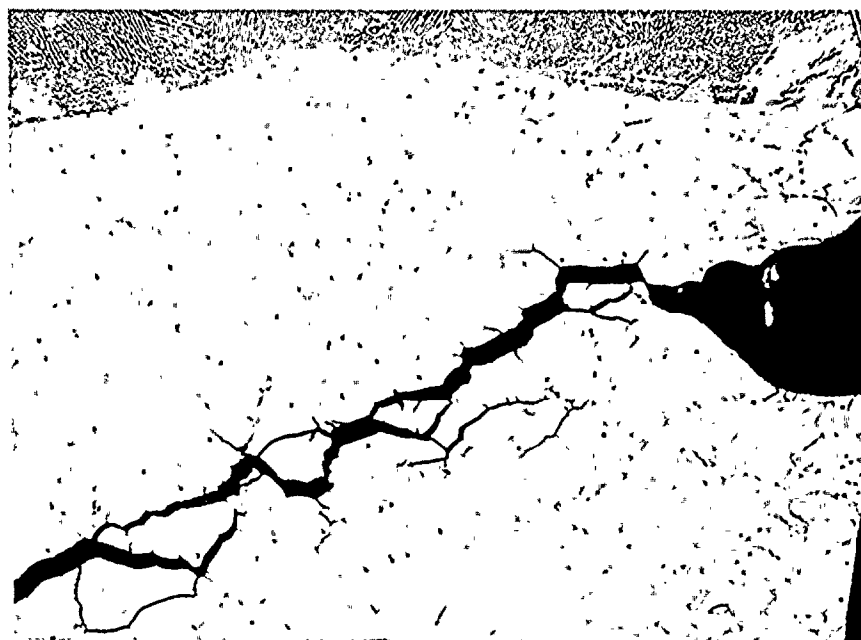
Penetrant examined - Boat Sample C, removed from weld SW-6 of Loop 13
